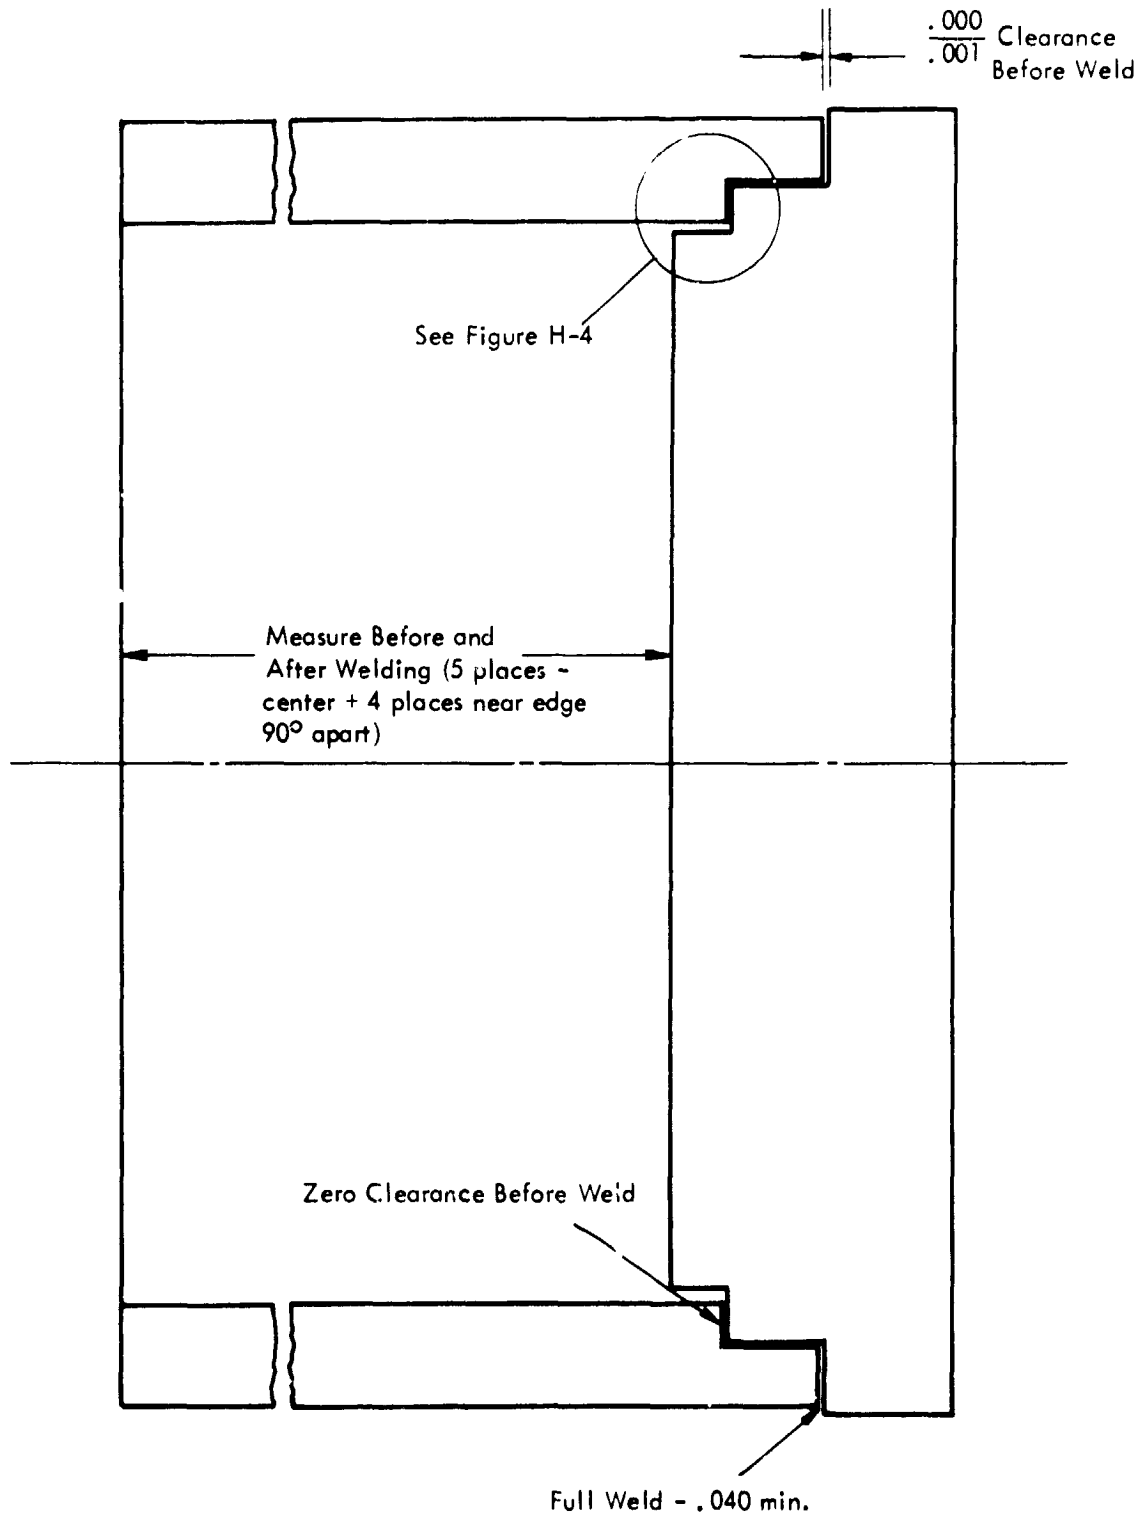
Weld Shrinkage Test Joint Configuration
